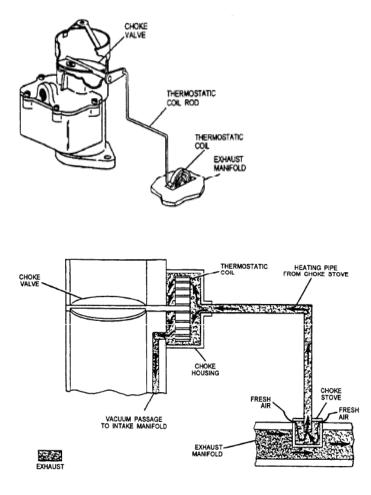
Well-type exhaust-heated choke Figure 1.33 Exhaust-manifold heat-tube choke
